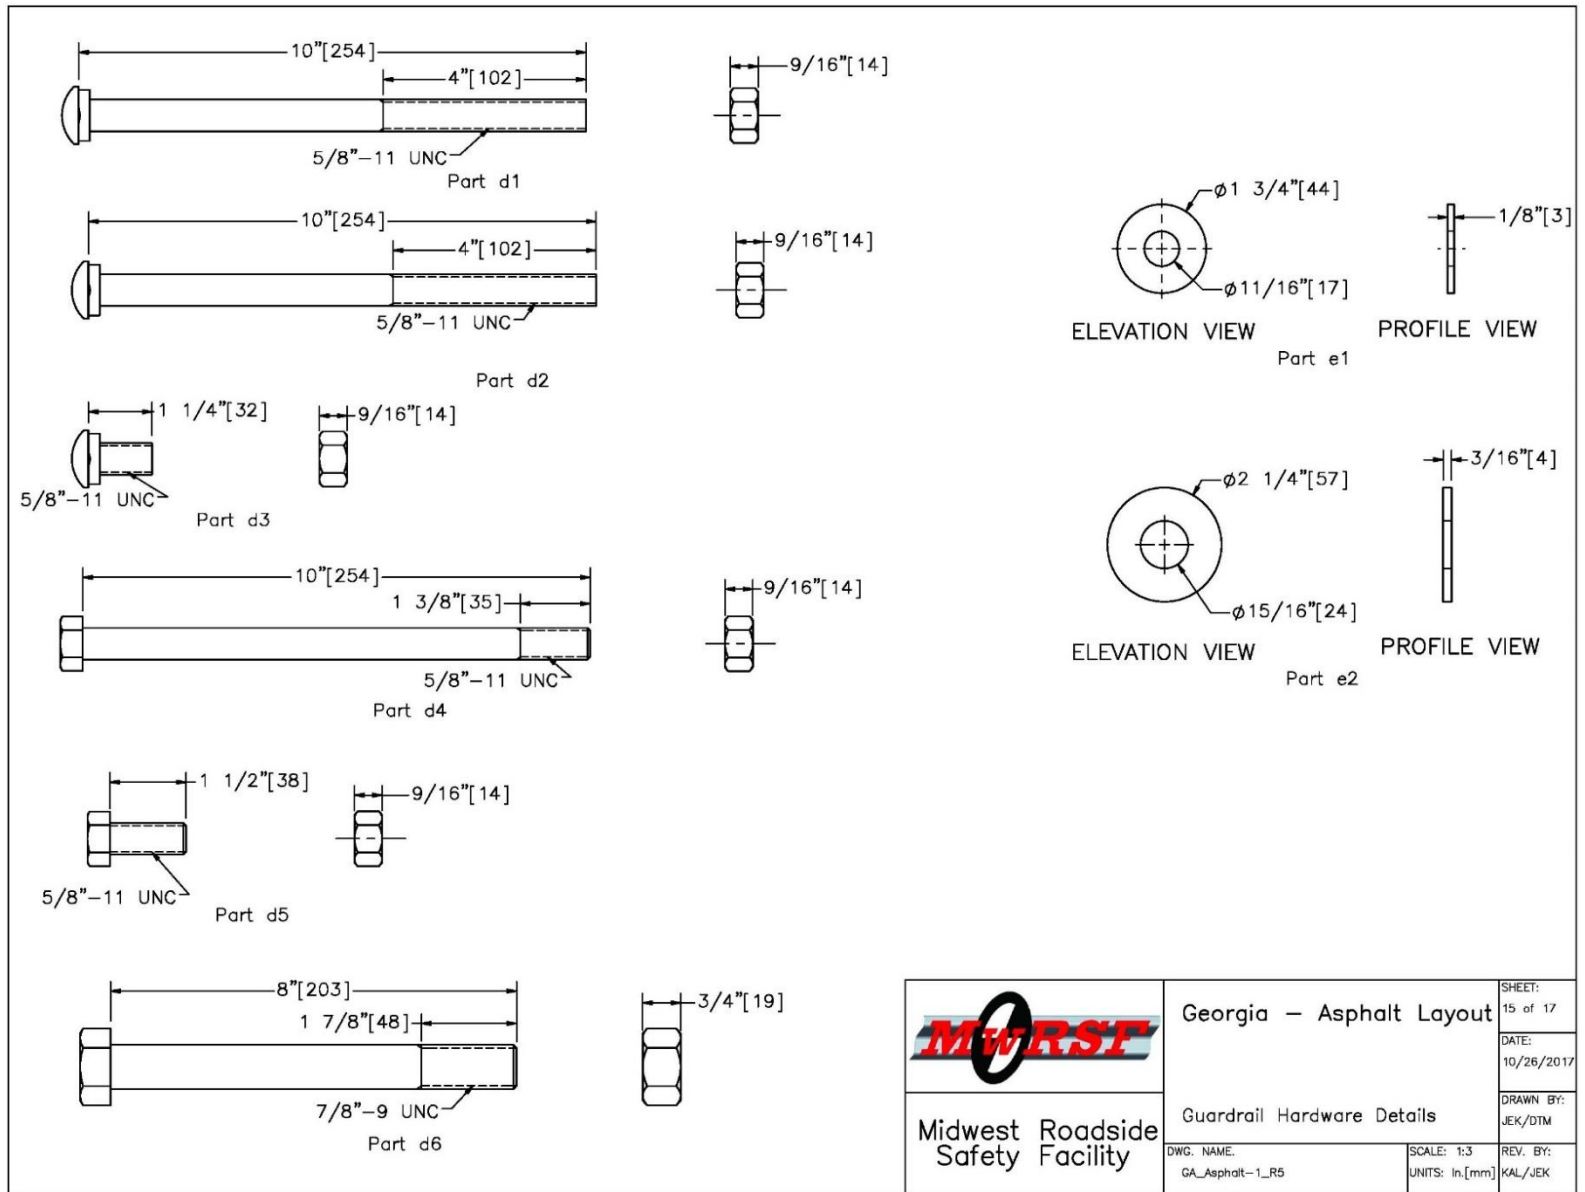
Guardrail Hardware Details, Test No. GAA-1
